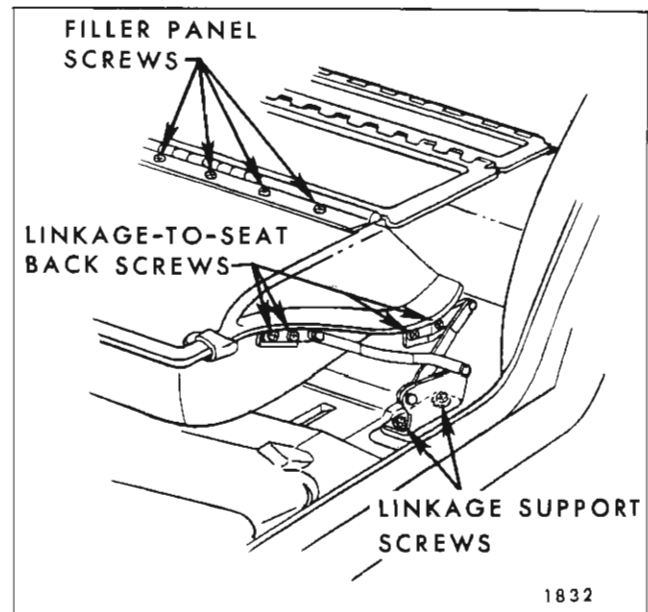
H20—Folding Second Seat Back Linkage and Filler Panel
